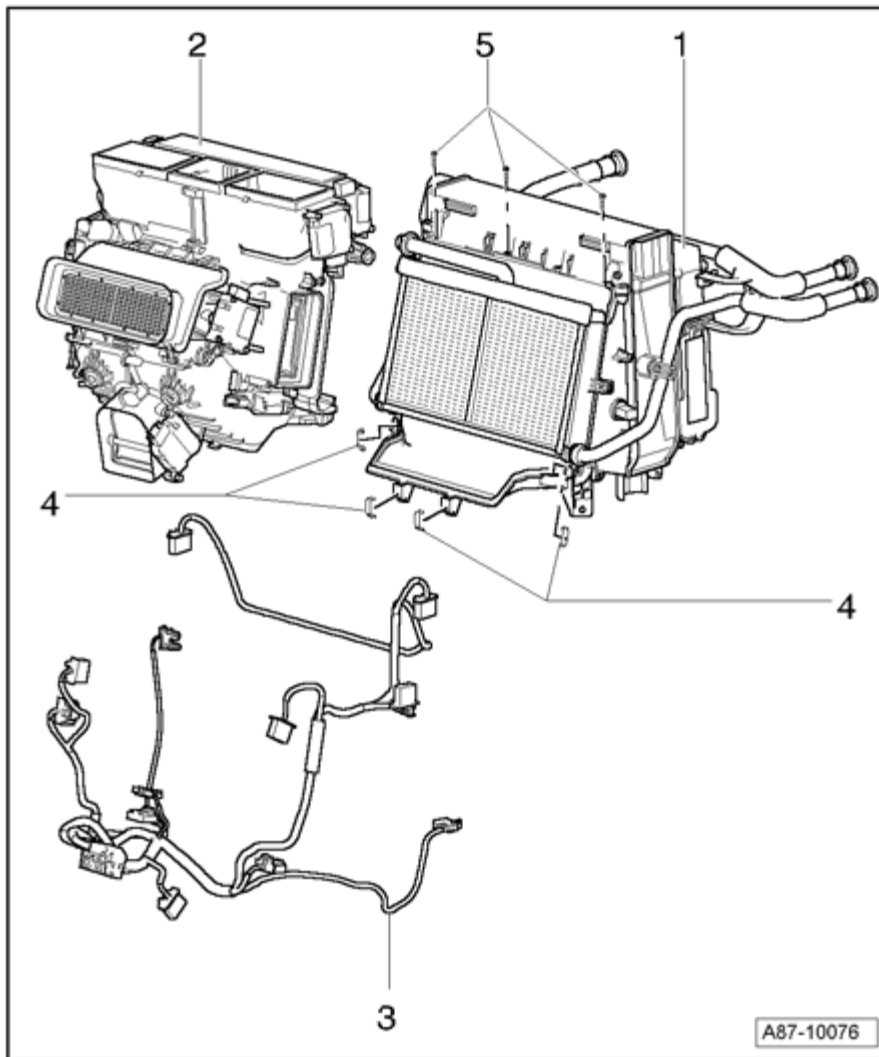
Identifying Housing For Evaporator And Heater Core, Air Distributor Housing, Heating And A/C Unit Wiring Harness, Clip, And Bolt
